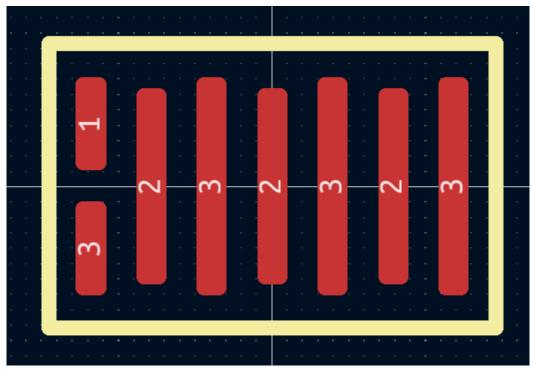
SOT-8072 footprint or land pattern, drawn in KiCad 6.0
